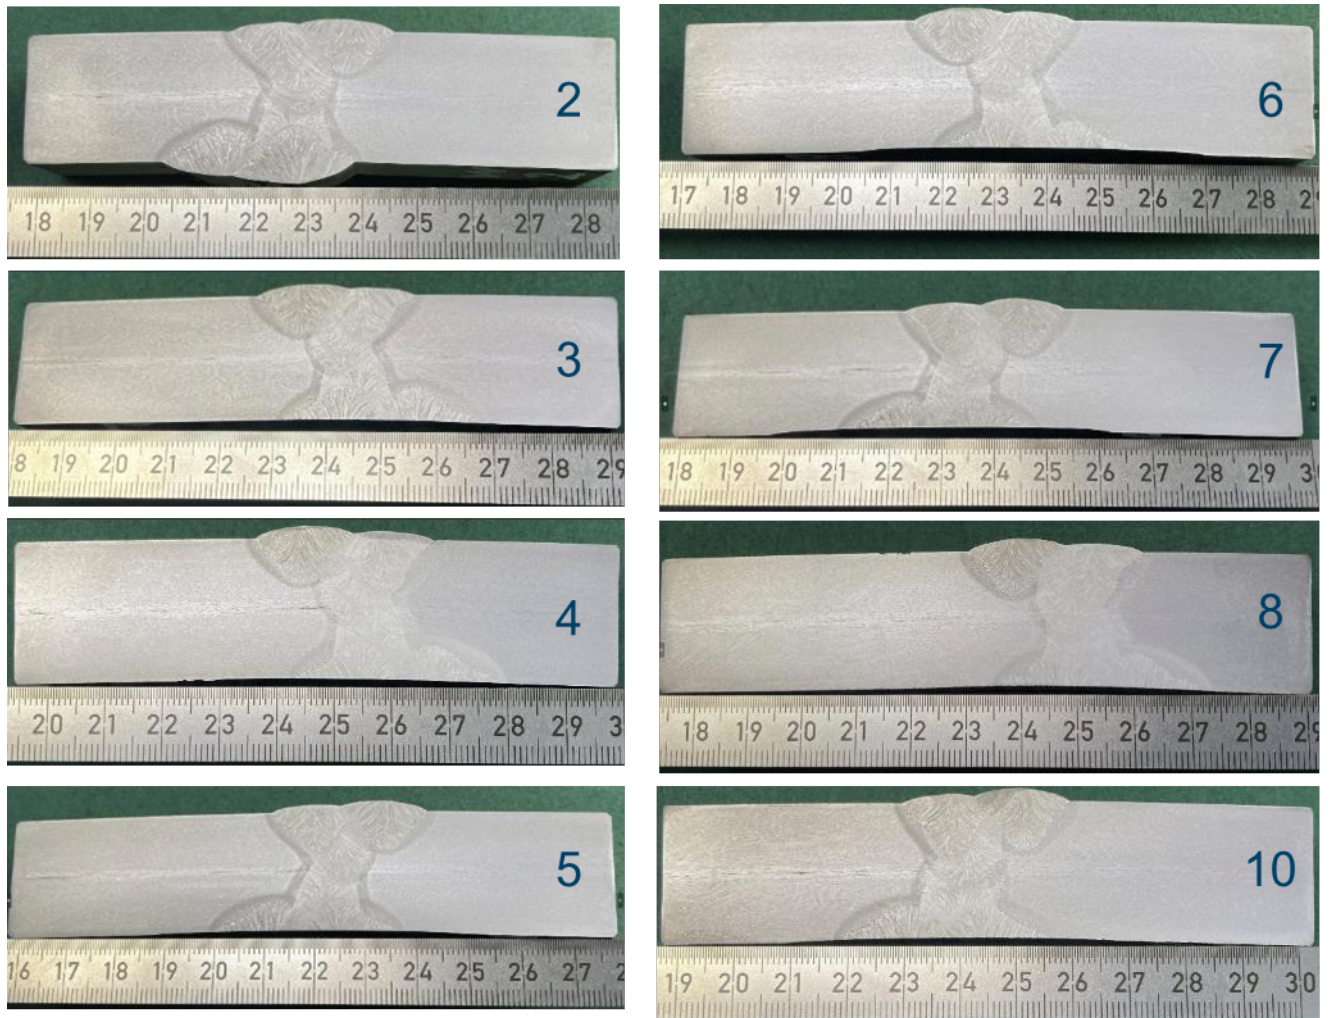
Macroscopic images of the weld cross-section for all included samples.
